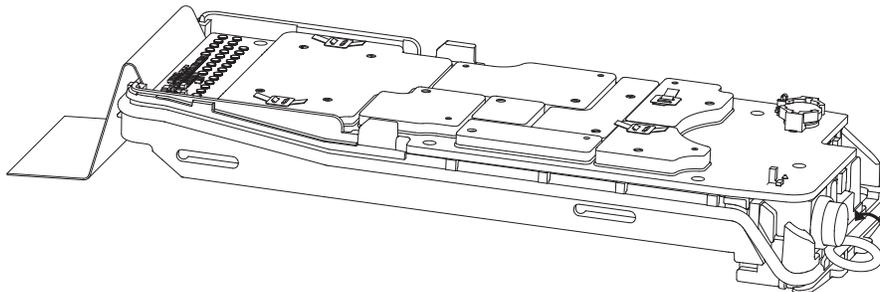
Assemble the Main O-Ring at Antenna Holder
